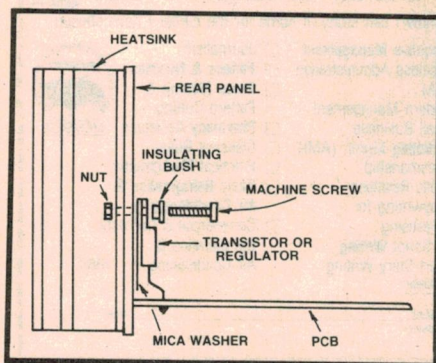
how the heatsink assembly goes together. Use your multimeter to check that the output devices are correctly insulated.
